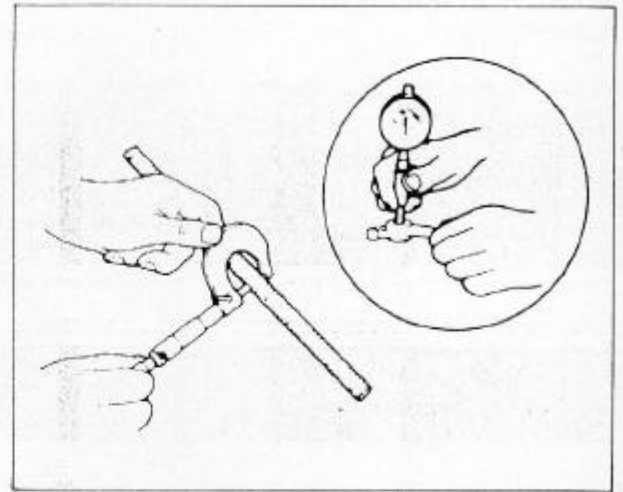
A — 53 MEASURING DIAMETER OF ROCKER ARM SHAFT AND INNER DIAMETER OF ROCKER ARM
